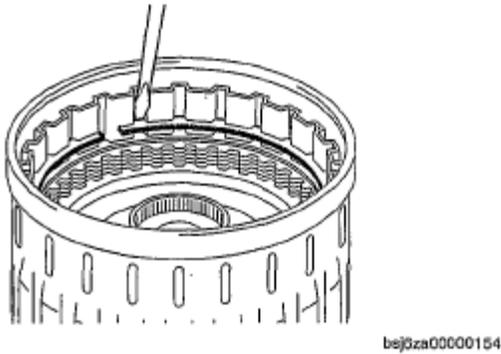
Removing Snap Ring (C3) From C2, C3 Clutch Drum
